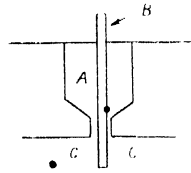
A*, feeding head; *B*, feeding rod; *C*, *C'*, casting.
